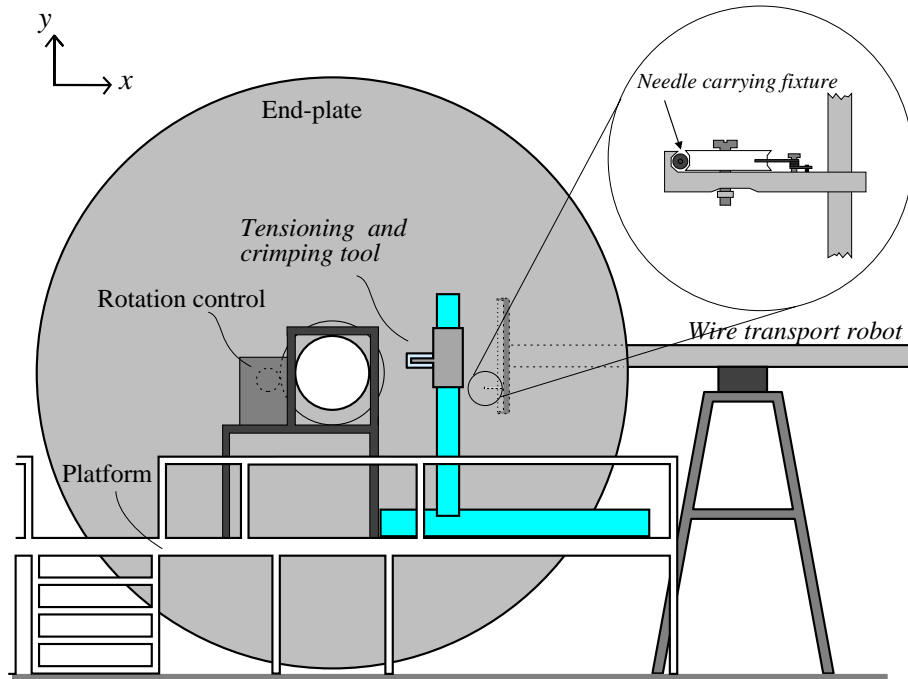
Sketch of the stringing system as seen from one end-plate. The wire transport robot is shown partially inserted into the chamber. Details of the needle carrying extension or “nose” are also shown.
